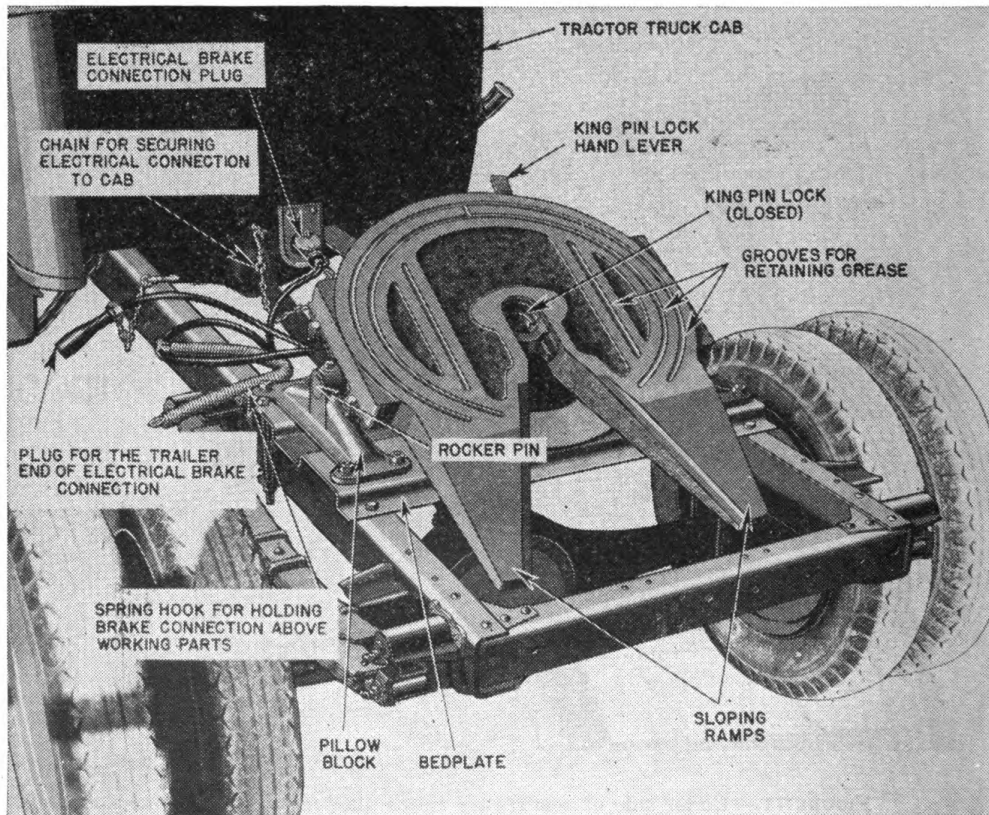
Lower fifth wheel mounted on tractor (semiautomatic coupling).
